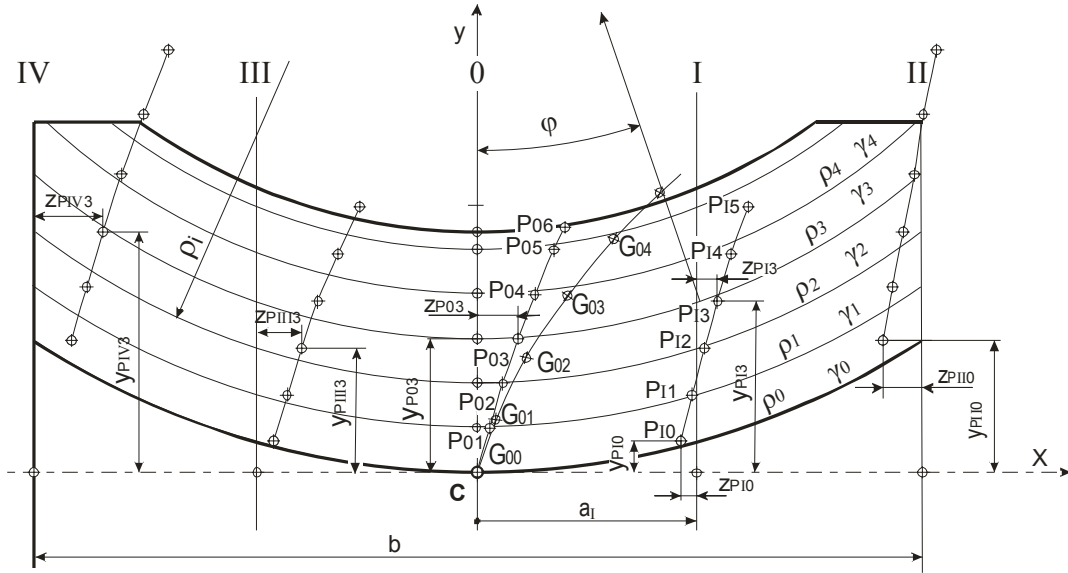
Axial view of the worm tooth flank including helical lines and worm tooth profiles in parallel planes
